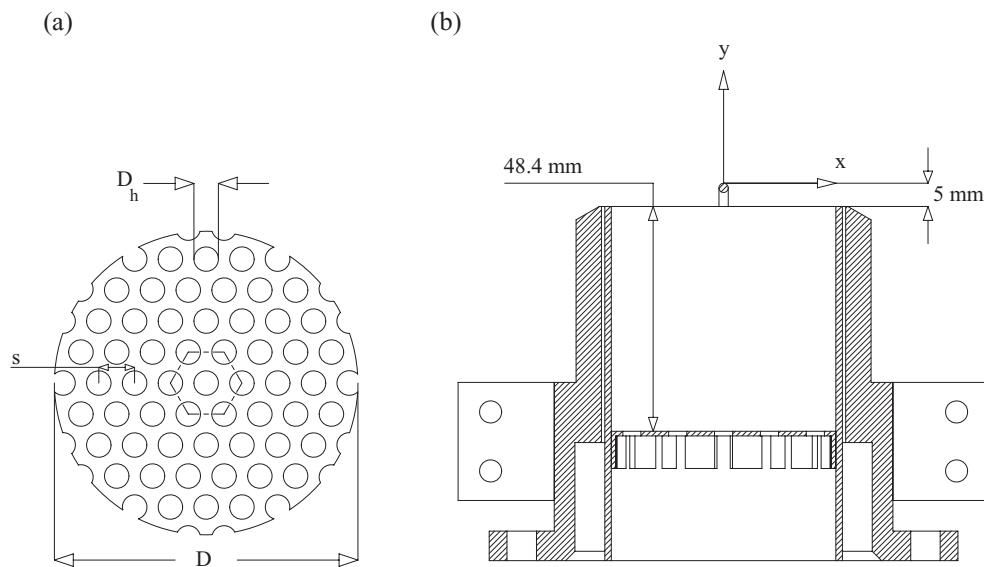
(a) Perforated plate and (b) plate arrangement inside the burner nozzle.
